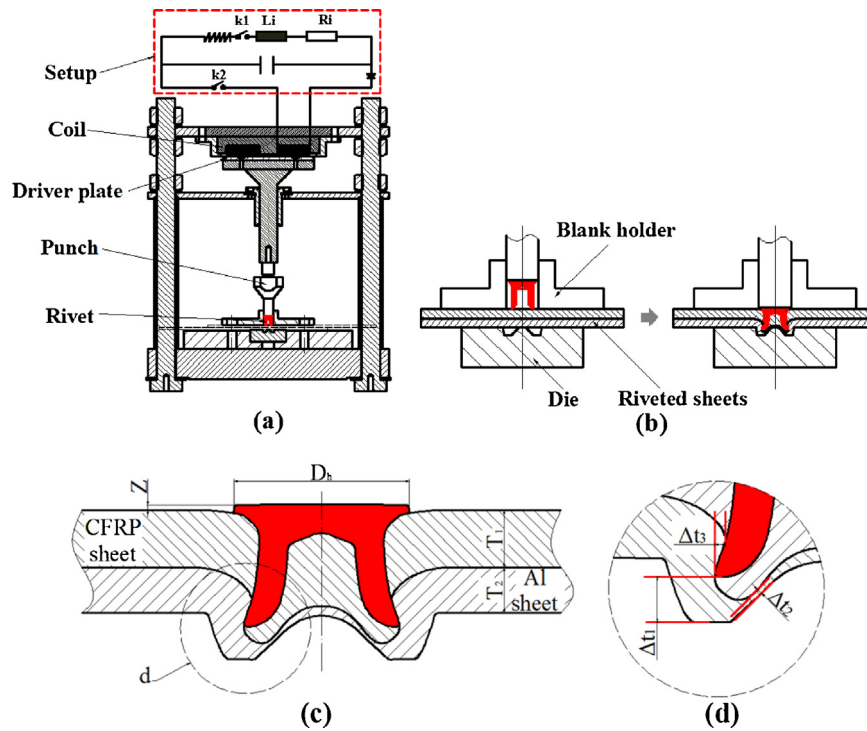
The schematic of E-SPR process: (a) equipment, (b) riveting process, (c) evaluation parameters and (d) partial enlarged detail.
